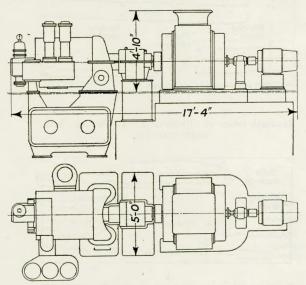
750 kW. turbo-alternator with 7,000/1,500 r.p.m. epicyclic gear
